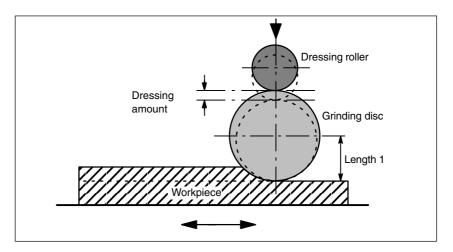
Dressing with a dressing roller in parallel to machining
